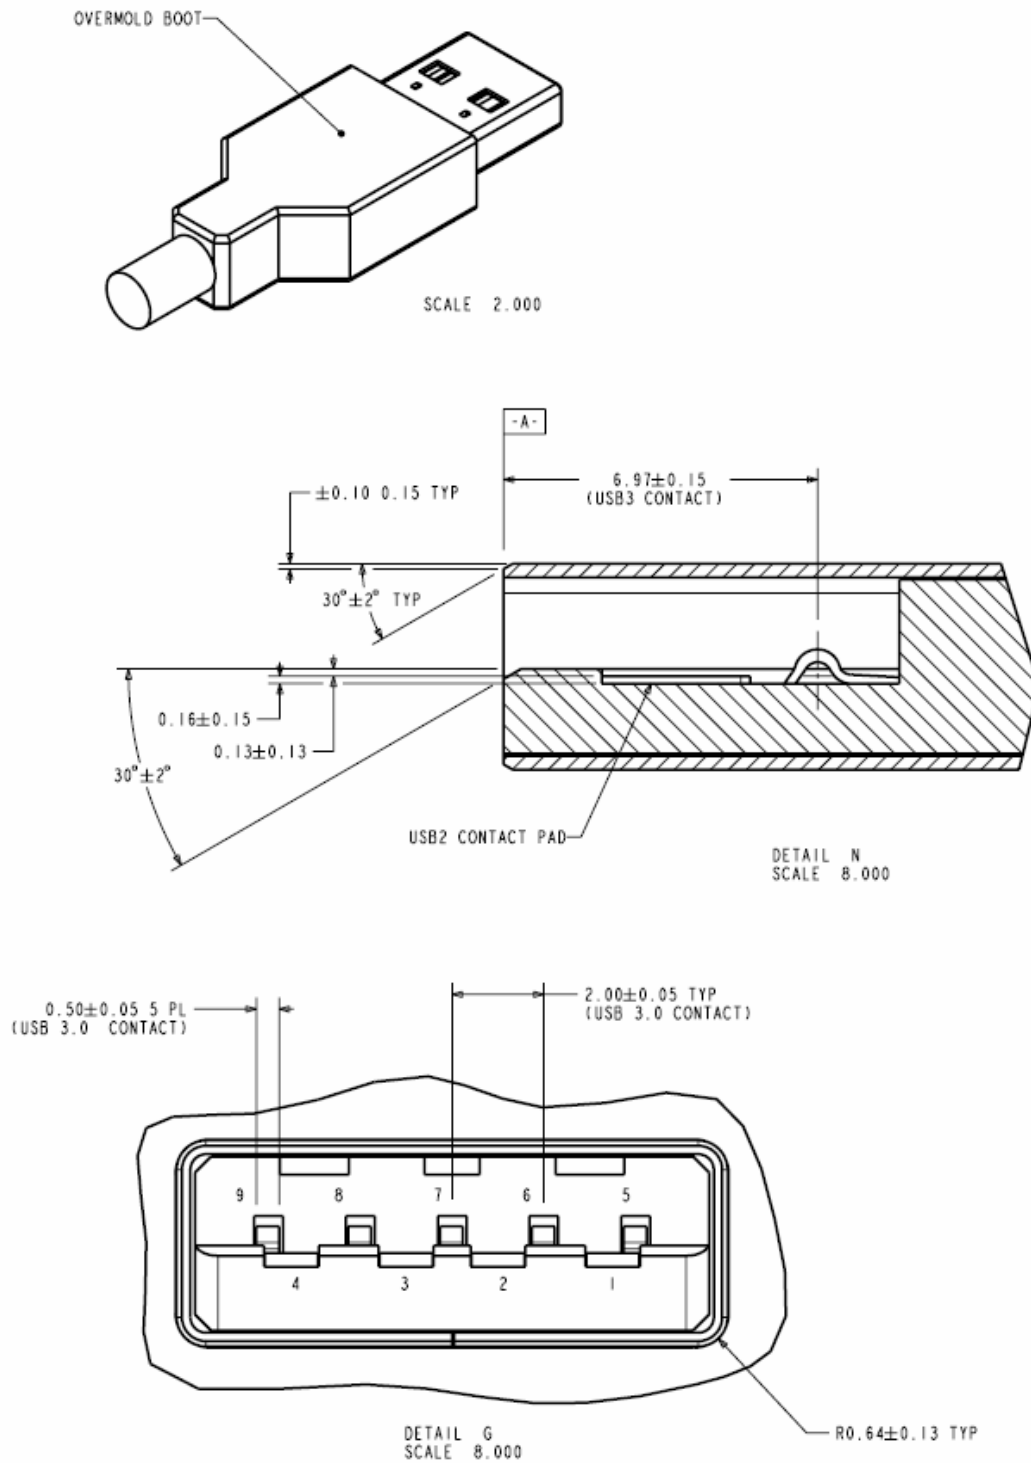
USB 3.0 Standard-A Plug Interface Dimensions
